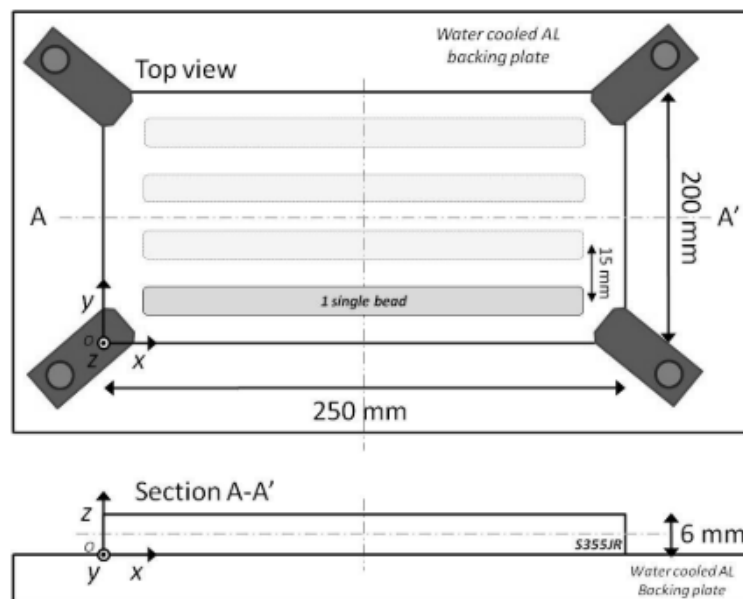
Clamping fixture with water cooled backing plate used by Almeida [19].
